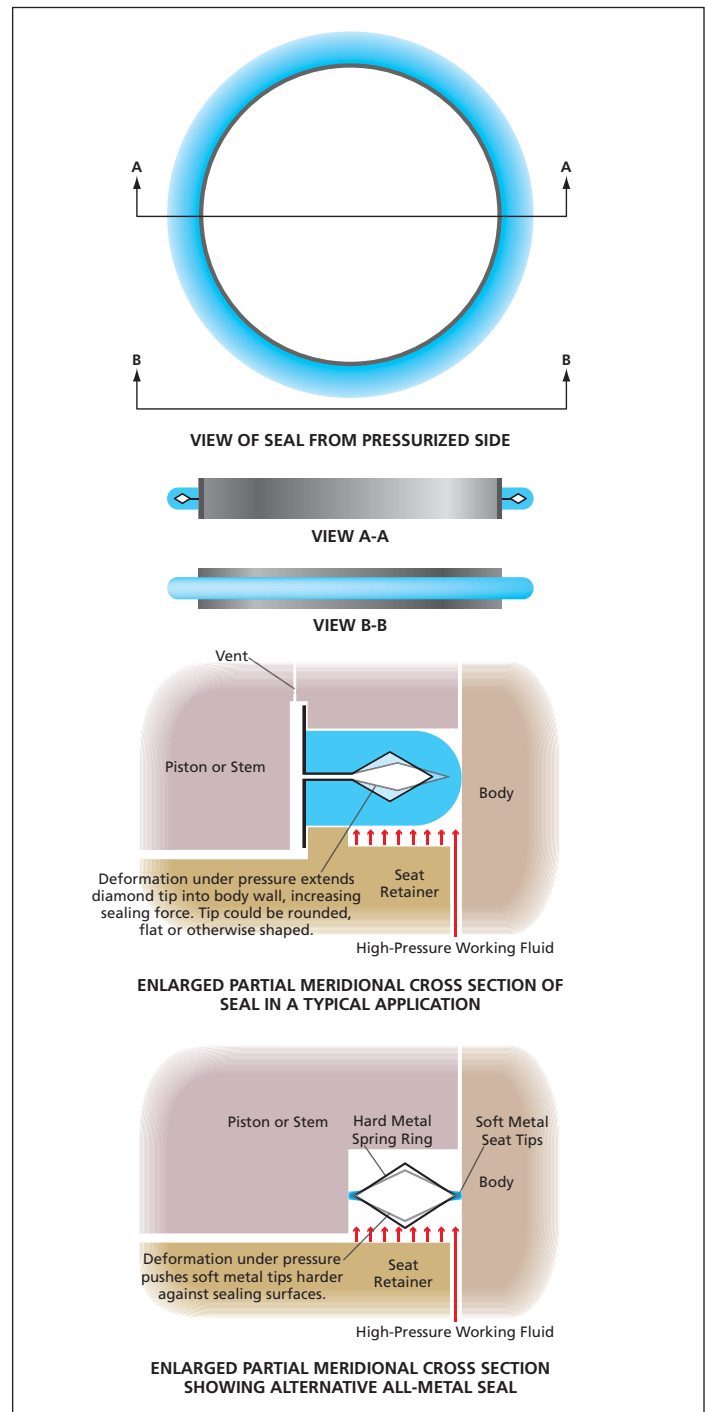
A Conceptual Pressure-Energized Seal Ring would be directly pushed axially (vertically in this view) against a gland sealing surface but would be indirectly pushed radially against the body sealing surface through squashing.
